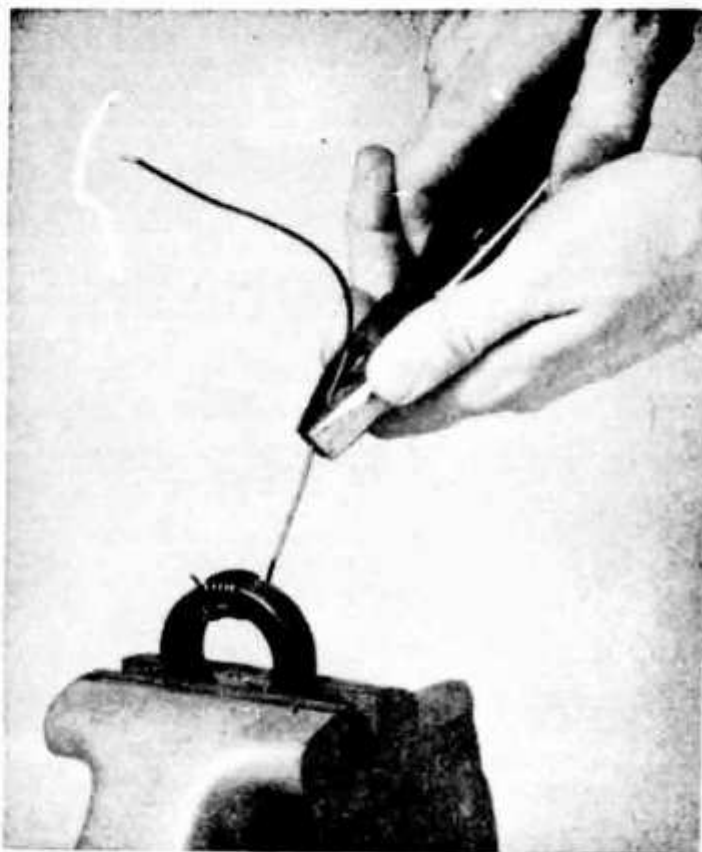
How not to wind your toroidal coils! The fragile core is sure to break if heavy wire is pulled taut with pliers. When winding toroids, the core should be hand held, and the wire pressed into place with your thumb.
